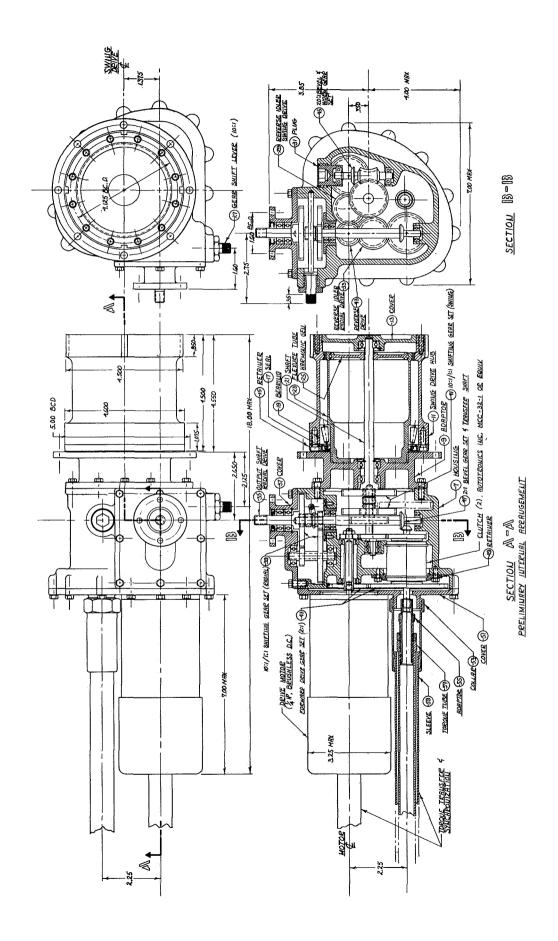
Counterbalance System - Counterweight Swing and Radial Drive Mechanism
